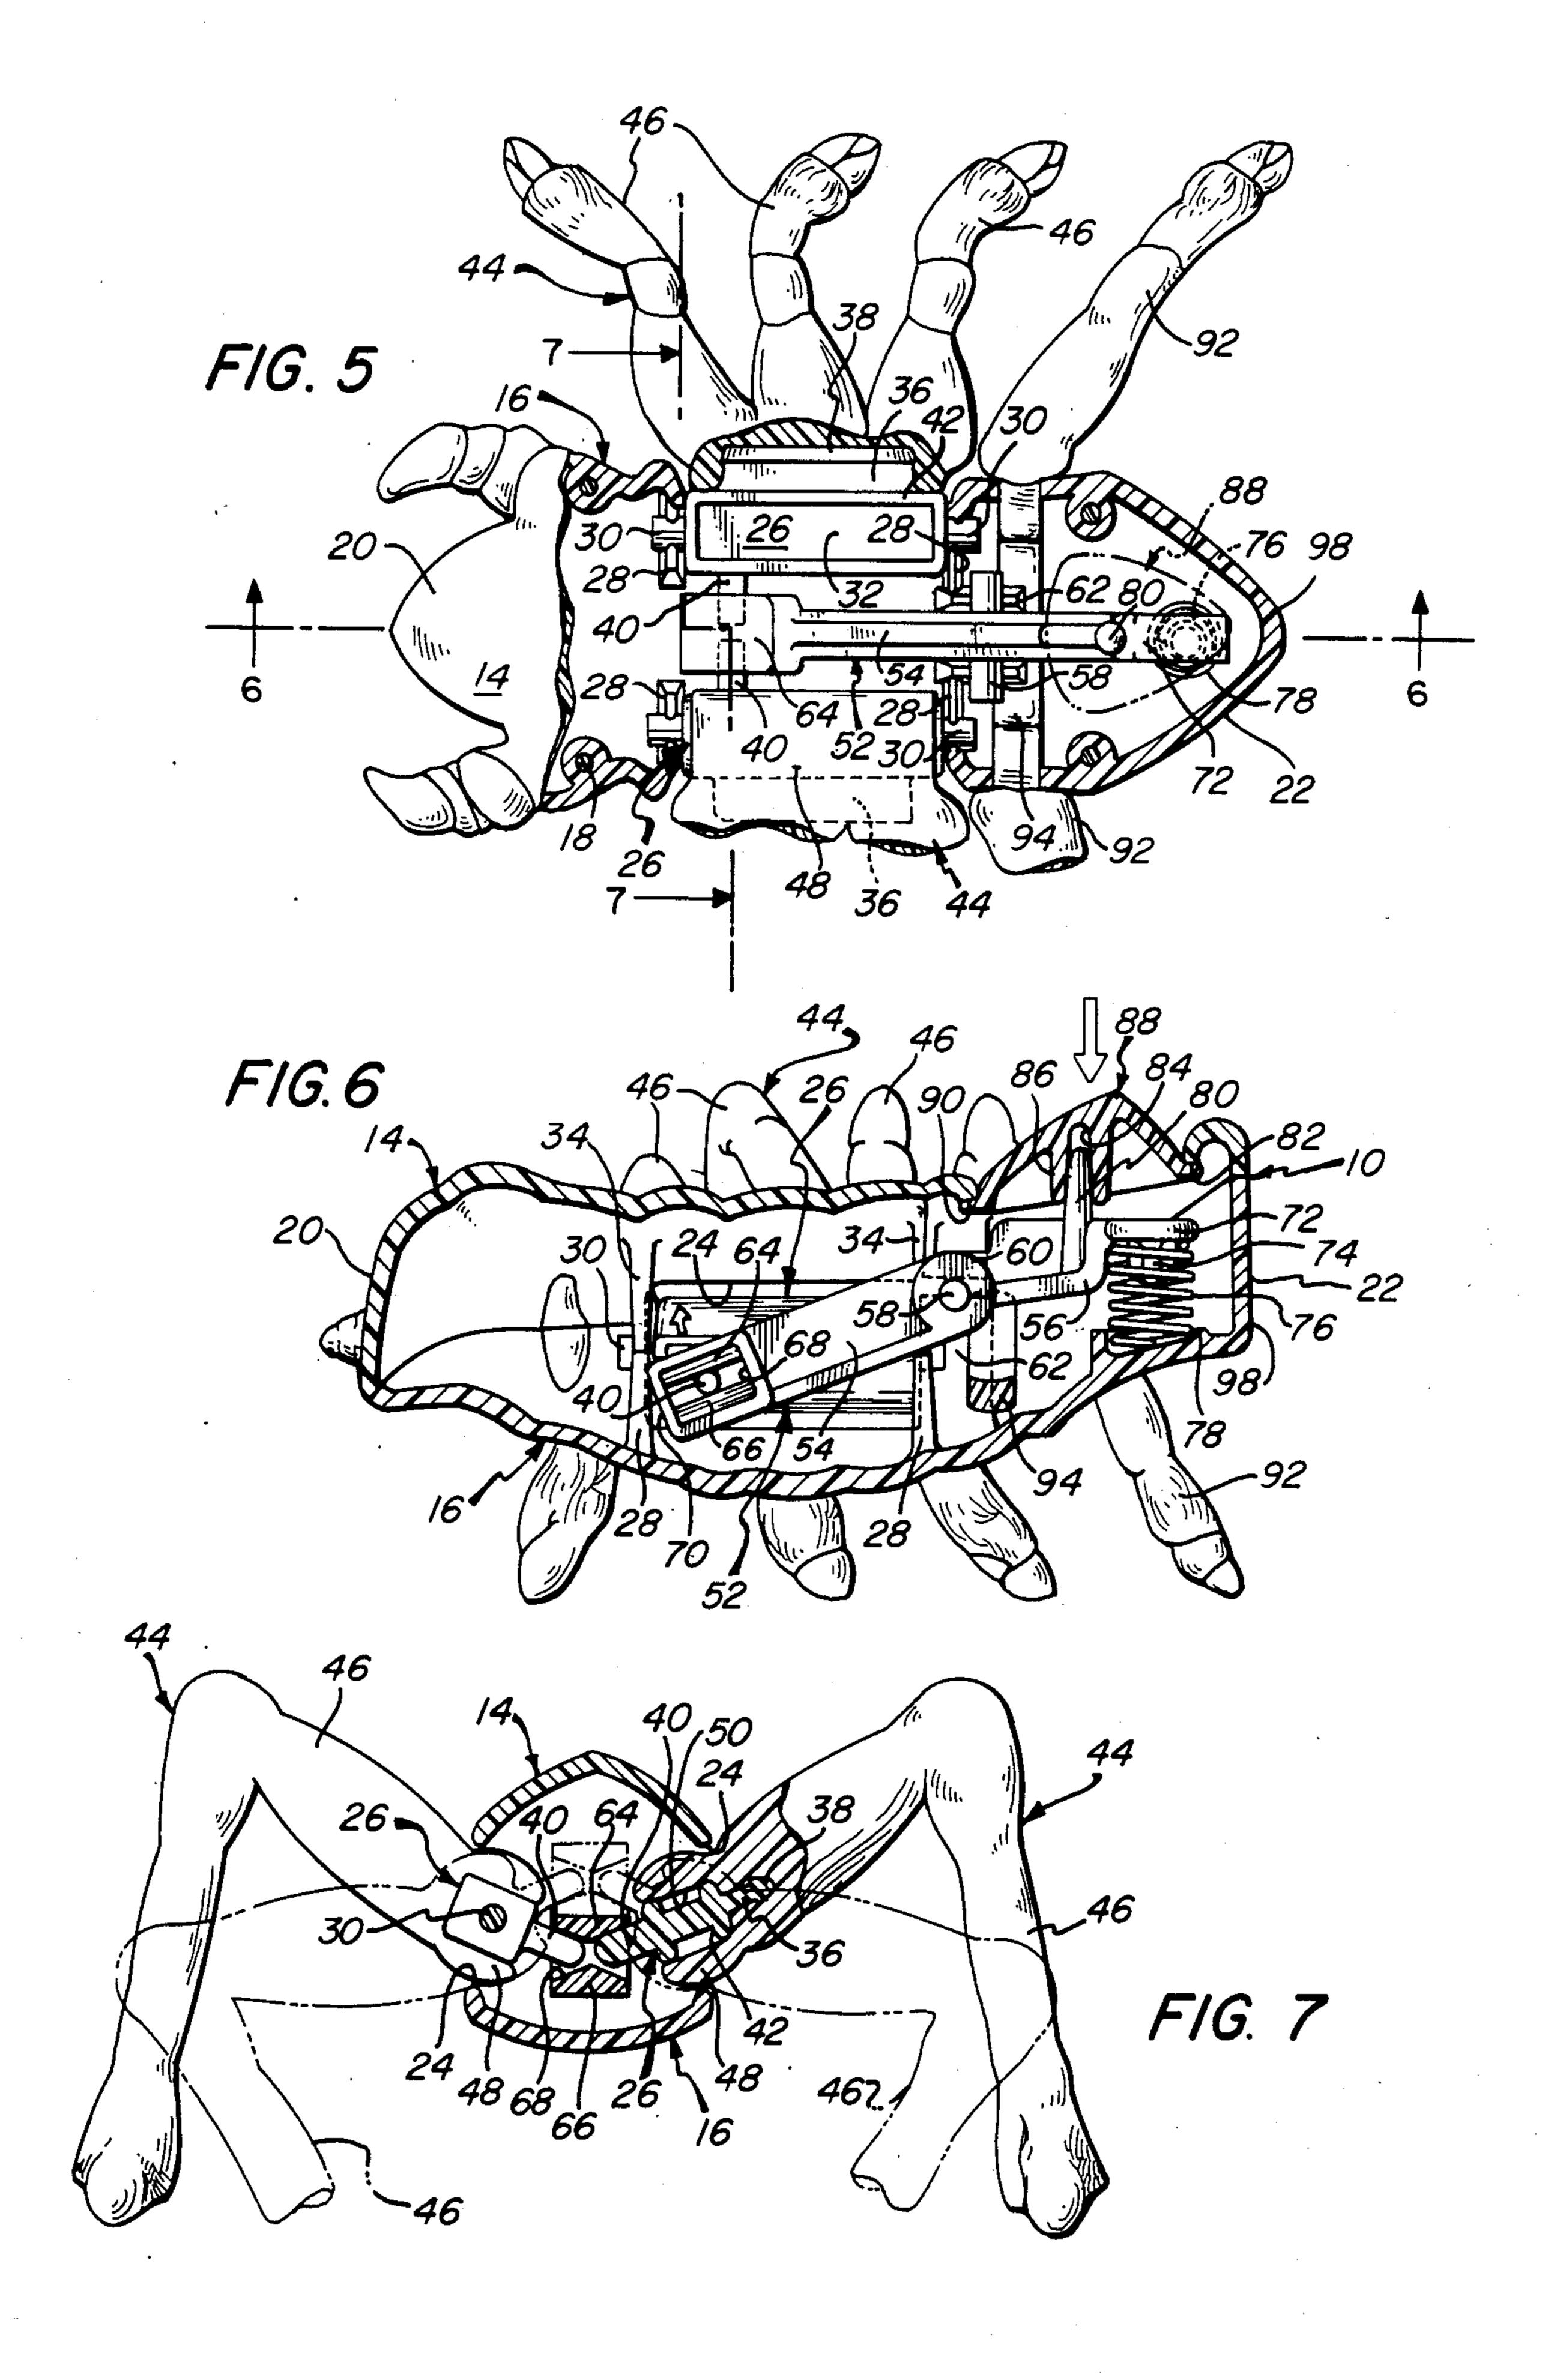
FIGURE TOY WITH GRIPPING LEGS ASSEMBLY
